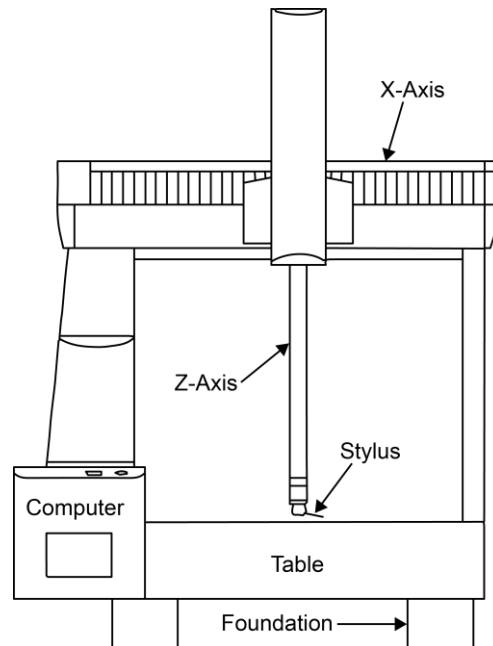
Layout of a coordinate measurement machine (based on Mitutoyo 2013, p. 6)
